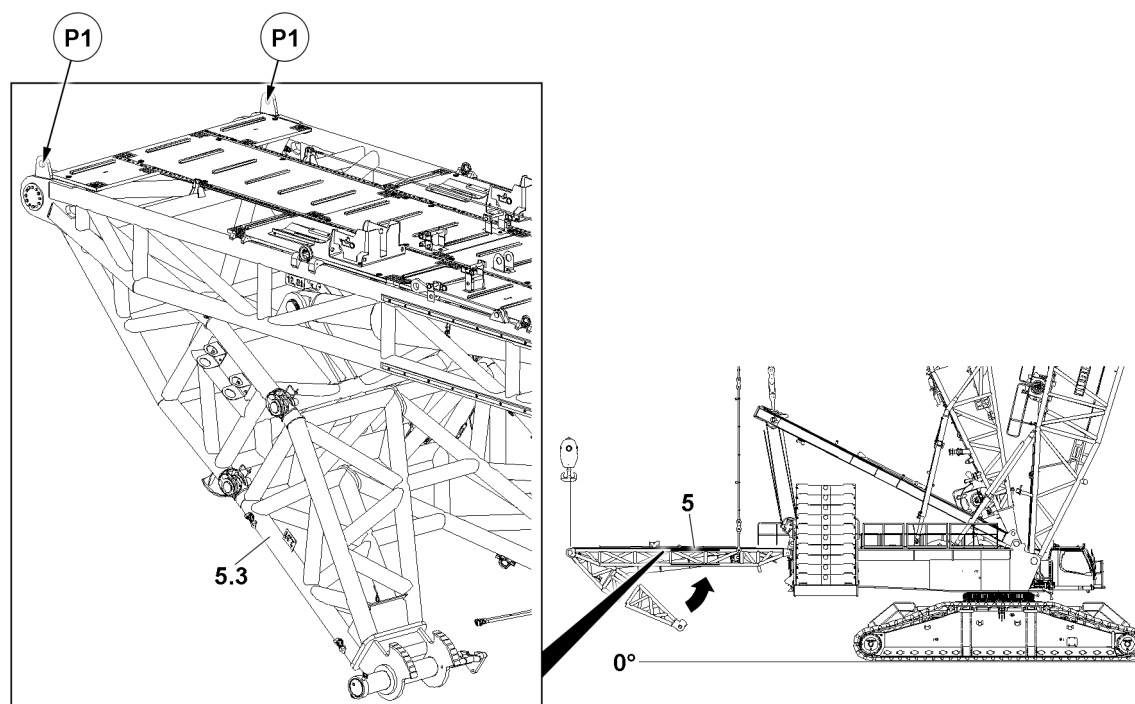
Assembling the D-guy rods on the suspended ballast guide "V-frame" – Fastening the suspended ballast guide "V-frame" to the auxiliary crane
